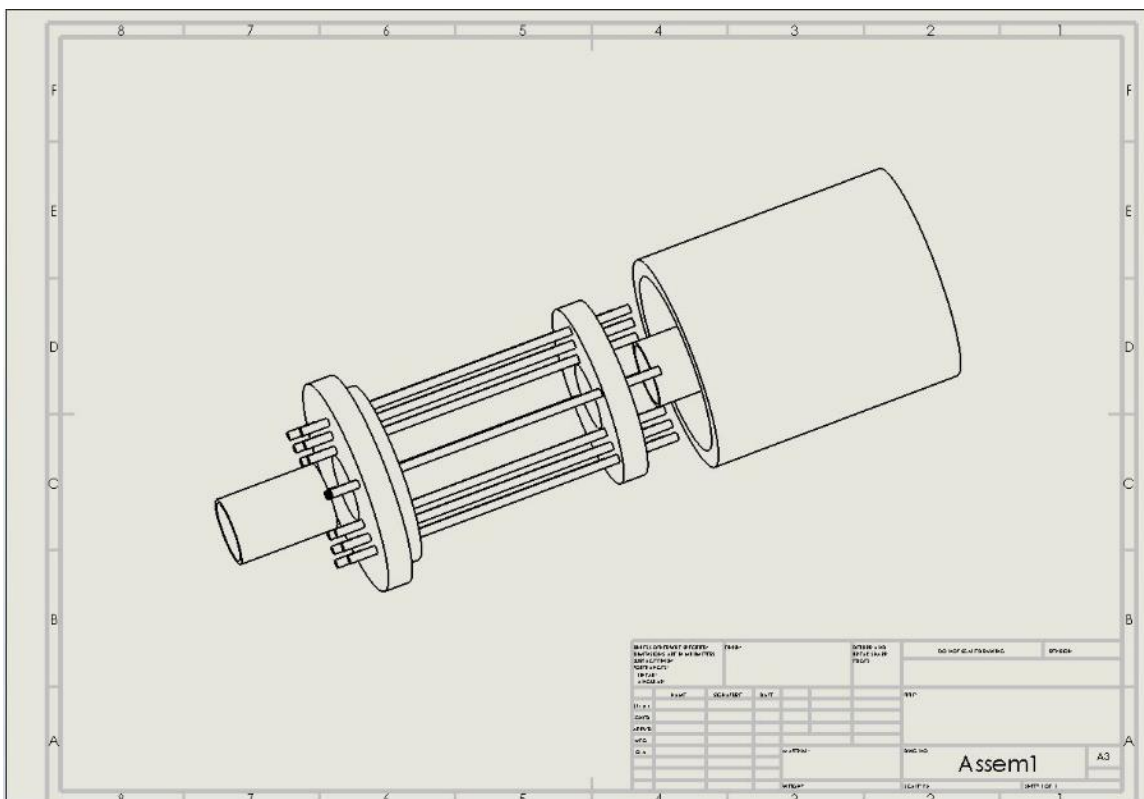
3D assembly drawing of first coaxial CNT speaker prototype.
